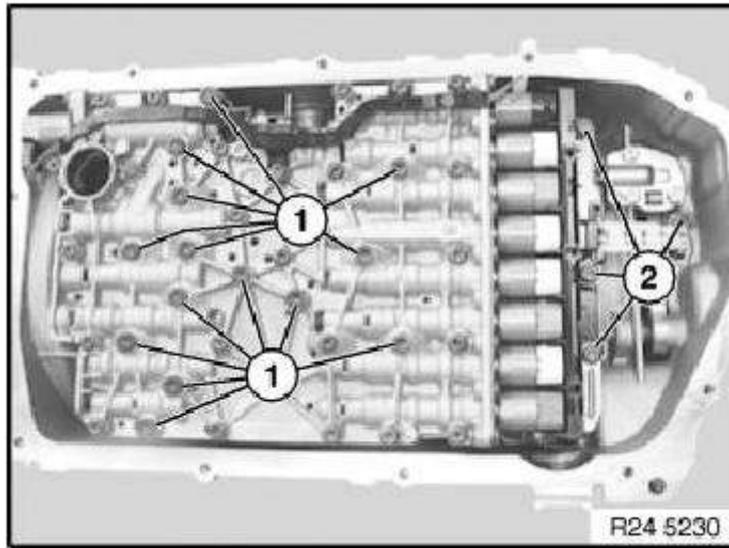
Identifying Mechatronics Unit Mounting Screws (For Vehicles Without Oil Reservoir)
